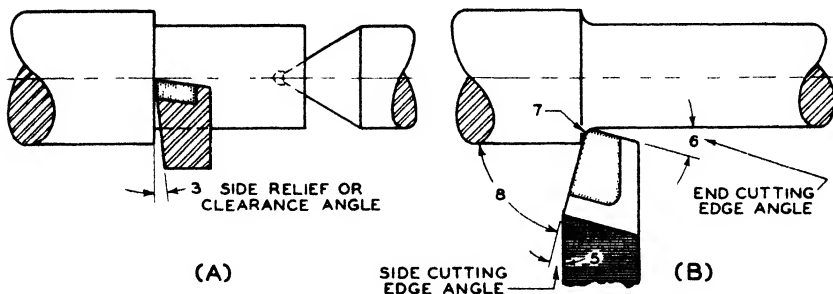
Side and End Cutting-Edge Angles, and Entering Angle
